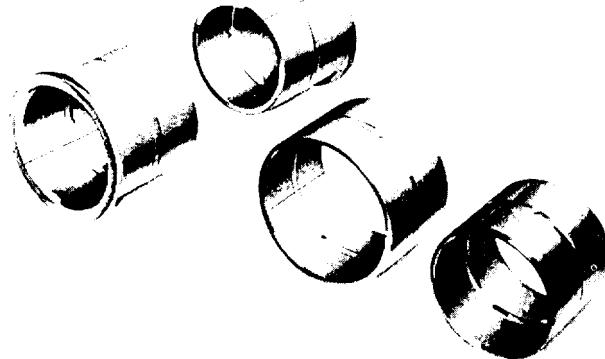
Crankpin Connecting Rod and Main Bearing Bushings
